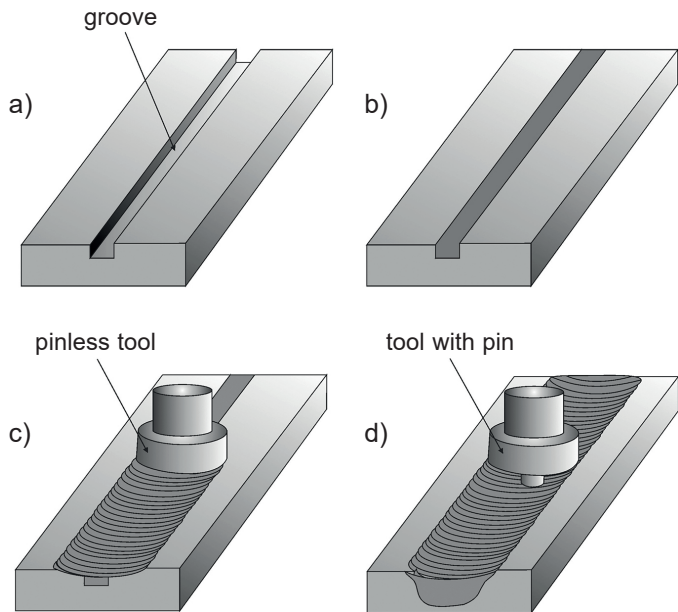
FSP groove technology: a) groove design, b) groove filled with modifying material, c) pre-friction processing by tool without pin, d) proper friction processing by tool with pin
